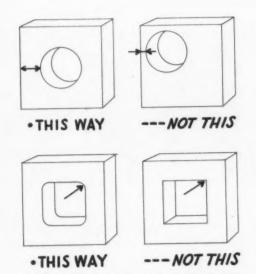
Sections should be equalized to permit uniform stress distribution during heating and quenching. Hardening failure is minimized by filleting to eliminate notch effect and stress cracks starting from corners.
